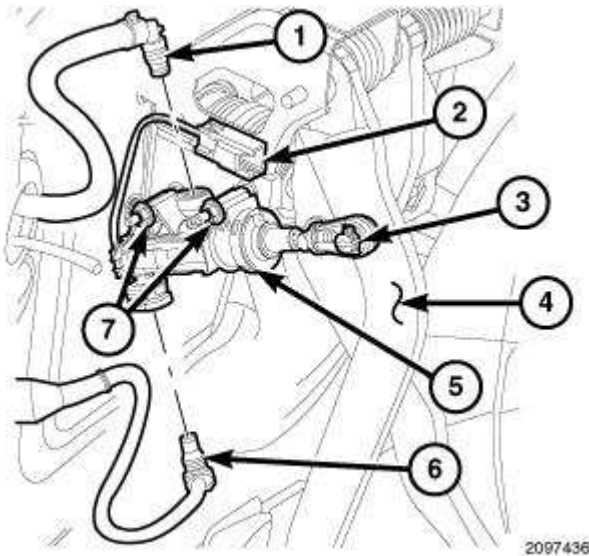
View Of Clutch Master Cylinder And Clutch Starter Interlock Switch
